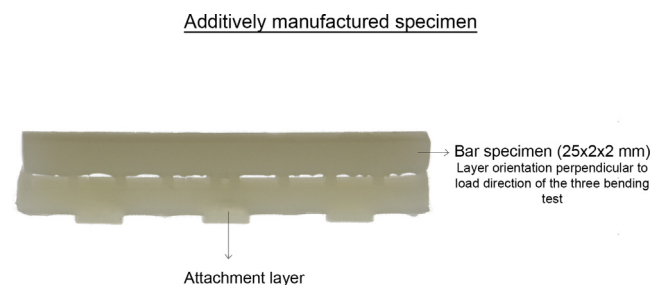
Additively manufactured specimen fabricated with layer orientation perpendicular to load direction of 3-point bend test.
